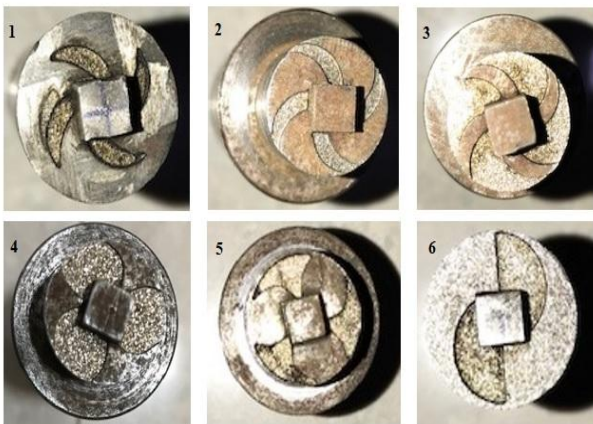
Six Different Friction Stir Welding Tools
